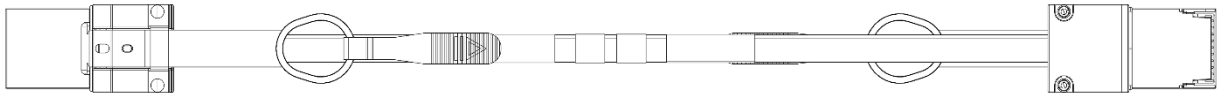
2D Drawing of a PCIe+ I/O Cable
